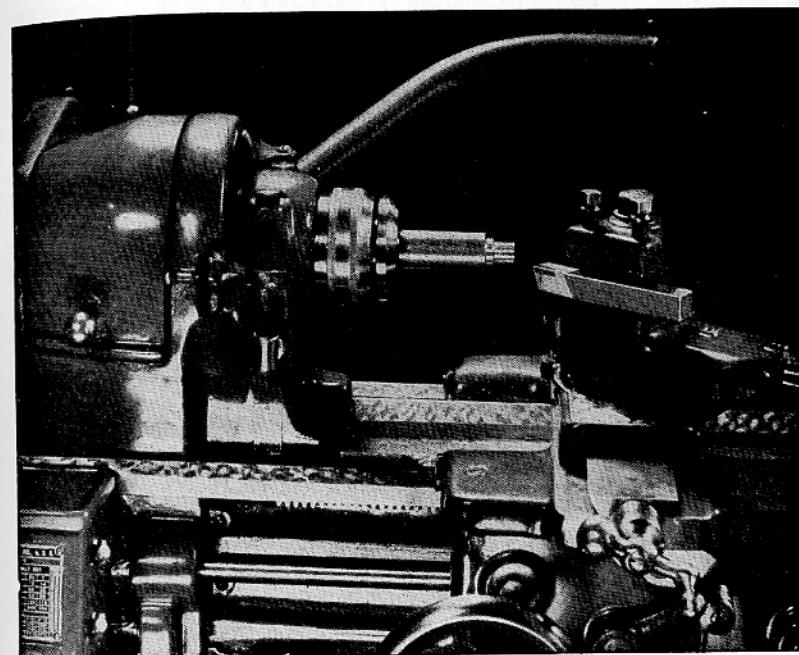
Carbide-tipped tool ready for use. (The South Bend Lathe Works)
